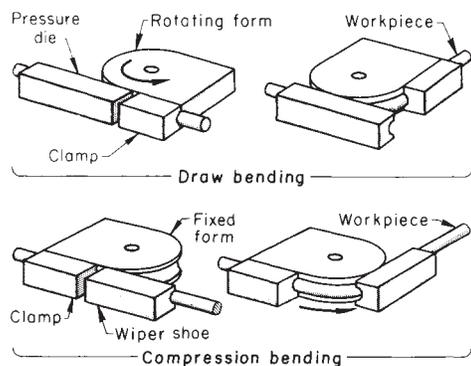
Essential components and mechanics of draw bending and compression bending of bars and bar sections
